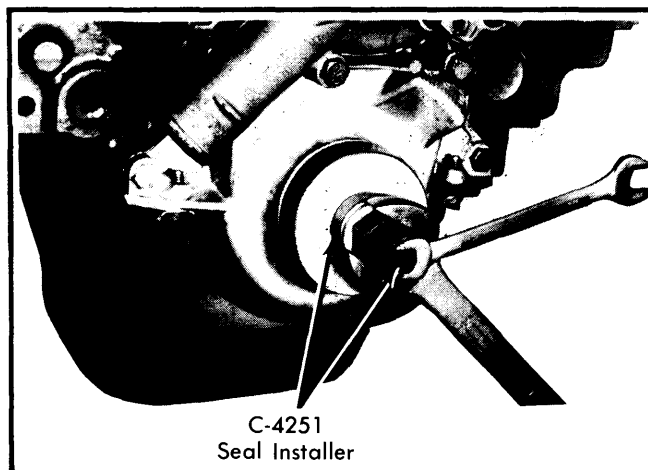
Using Tool C-4251 to Install Front Cover Oil Seal
